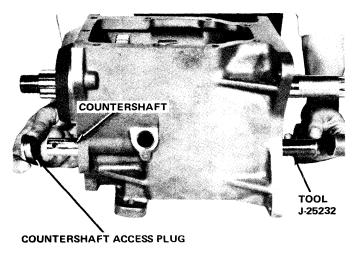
Removing—Installing Countershaft Roll Pin
